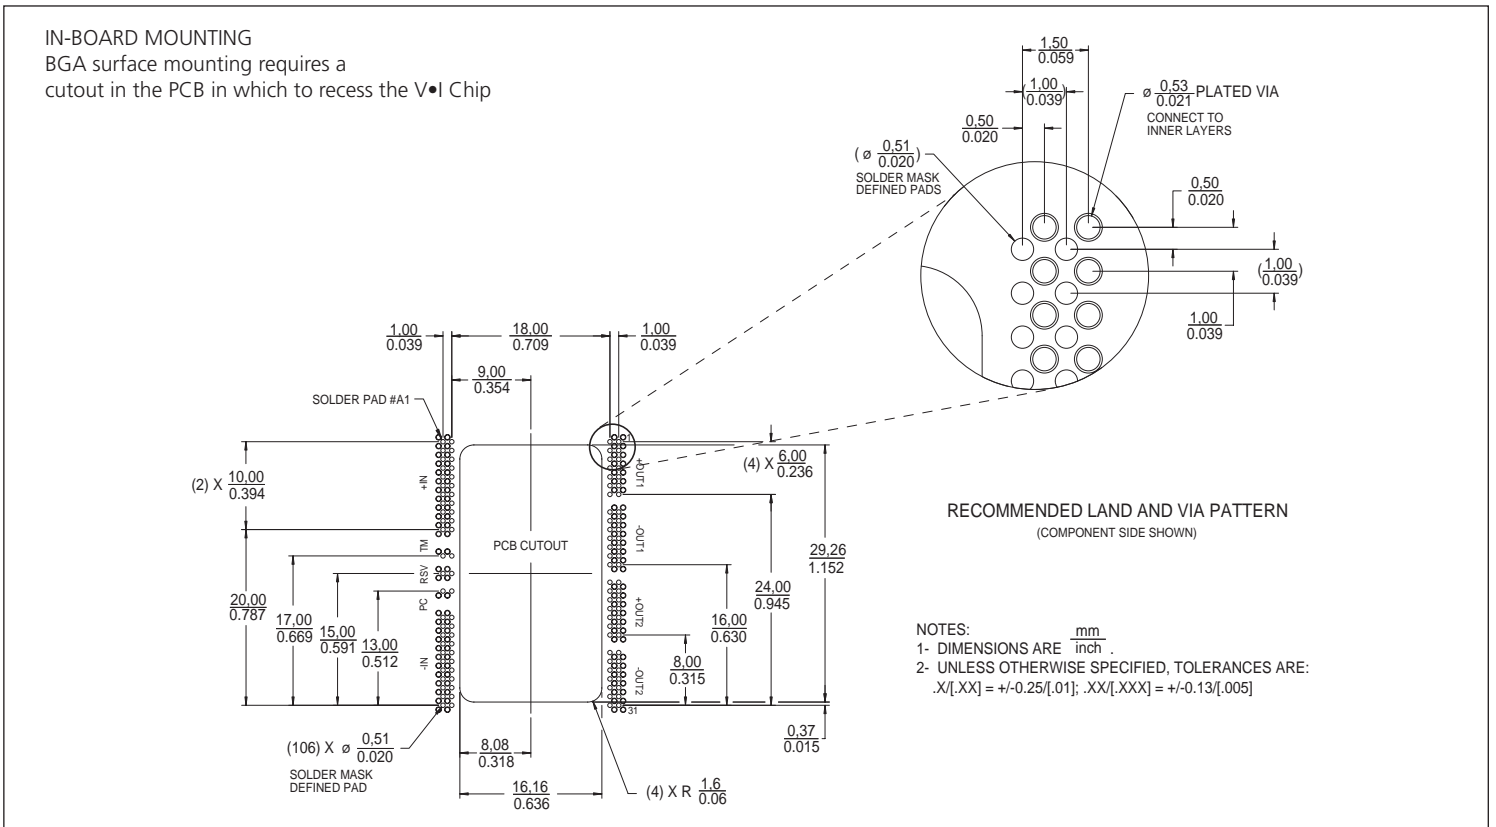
BCM BGA PCB land/VIA layout information; Inboard mounting
